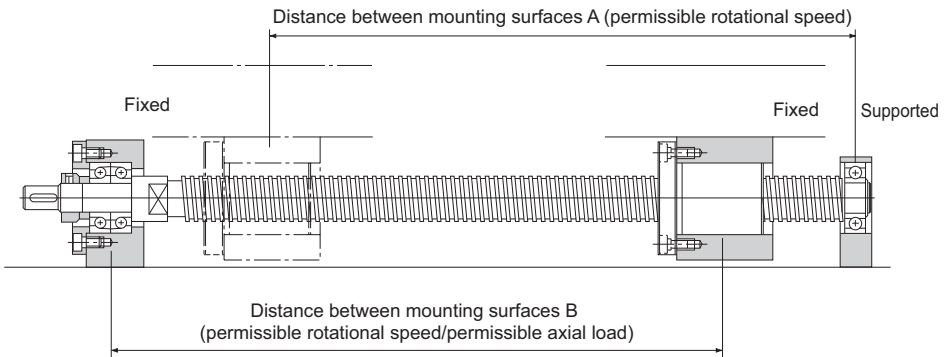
Screw Shaft Mounting Method: Fixed - Supported
